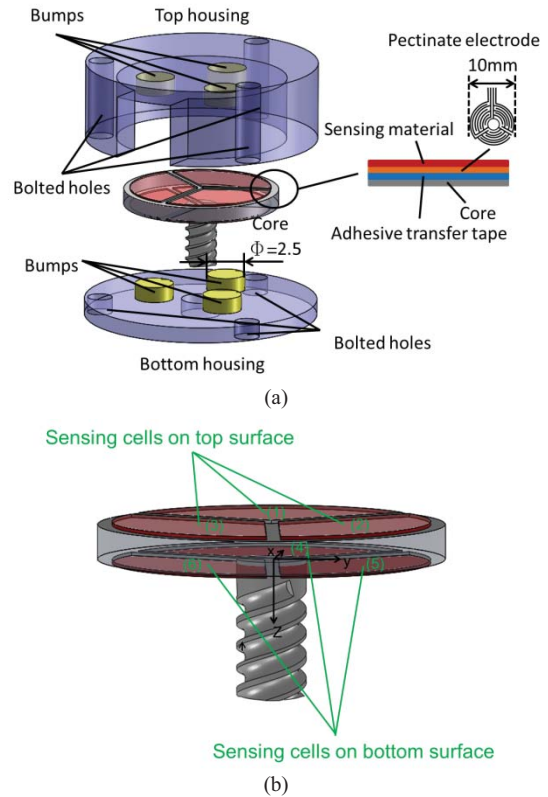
(a) Structure of the sensor including the top housing, the core, and the bottom housing. (b) Three sensing cells on the top and bottom surfaces.
